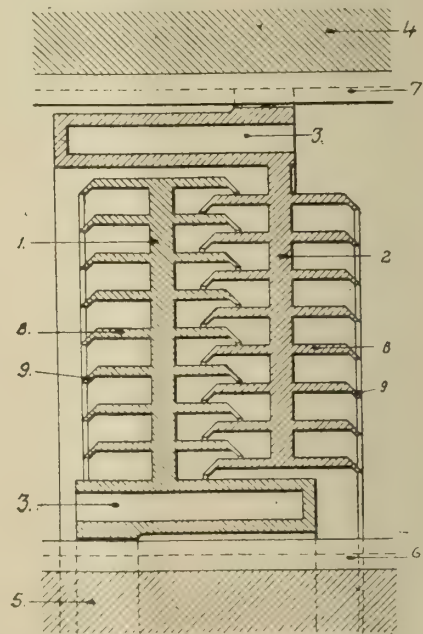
CROSS SECTION OF SHAFT PACKING.
